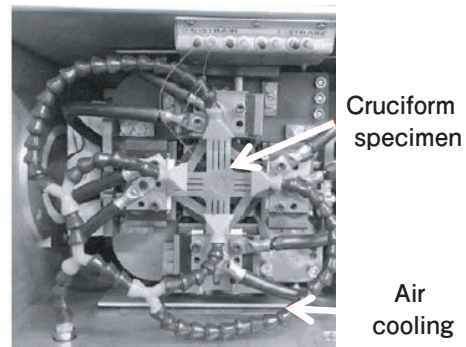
Biaxial tensile test fixture for evaluating forming limits under high-temperature⁴⁾.
